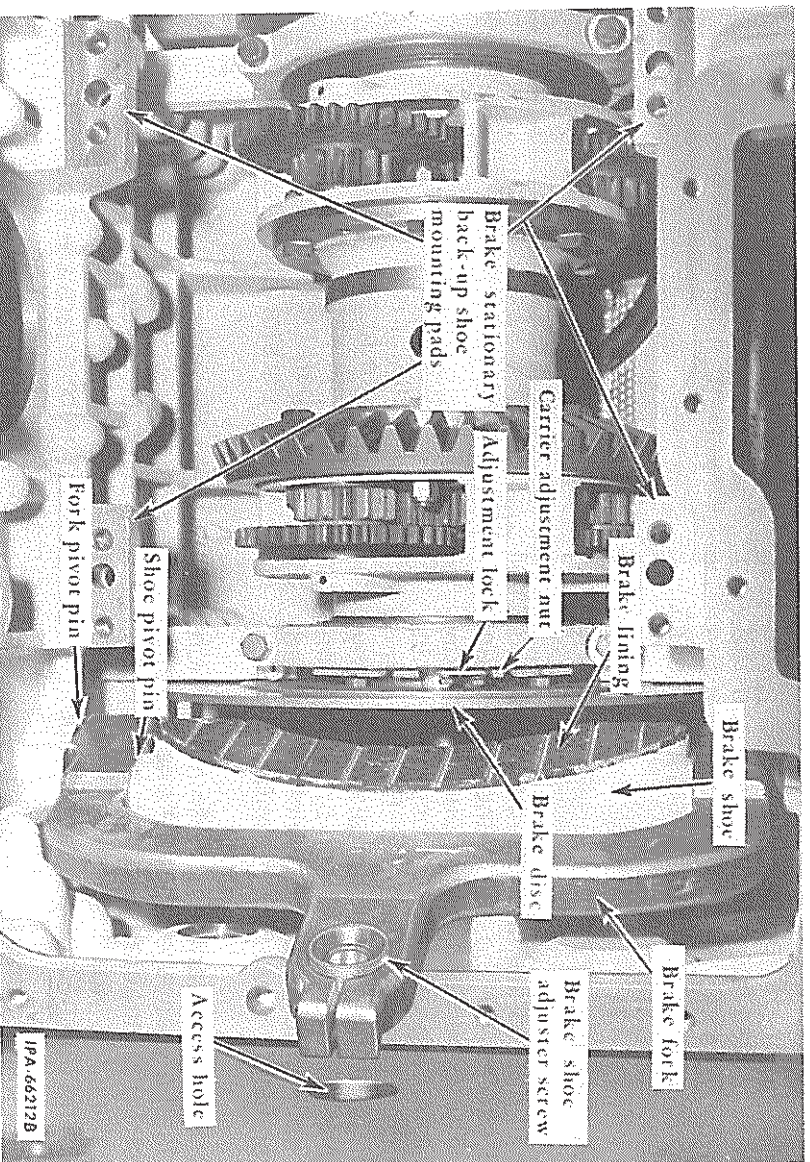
Steering Planetary Brakes (Stationary Backup Shoes Removed)
